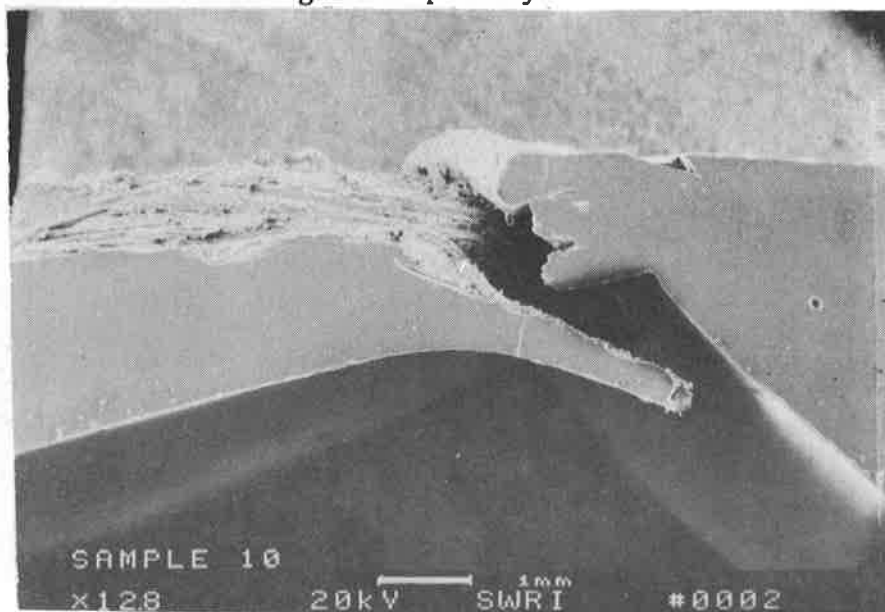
SEM IMAGE OF THIN SECTION CUT PERPENDICULAR TO WELD AXIS
